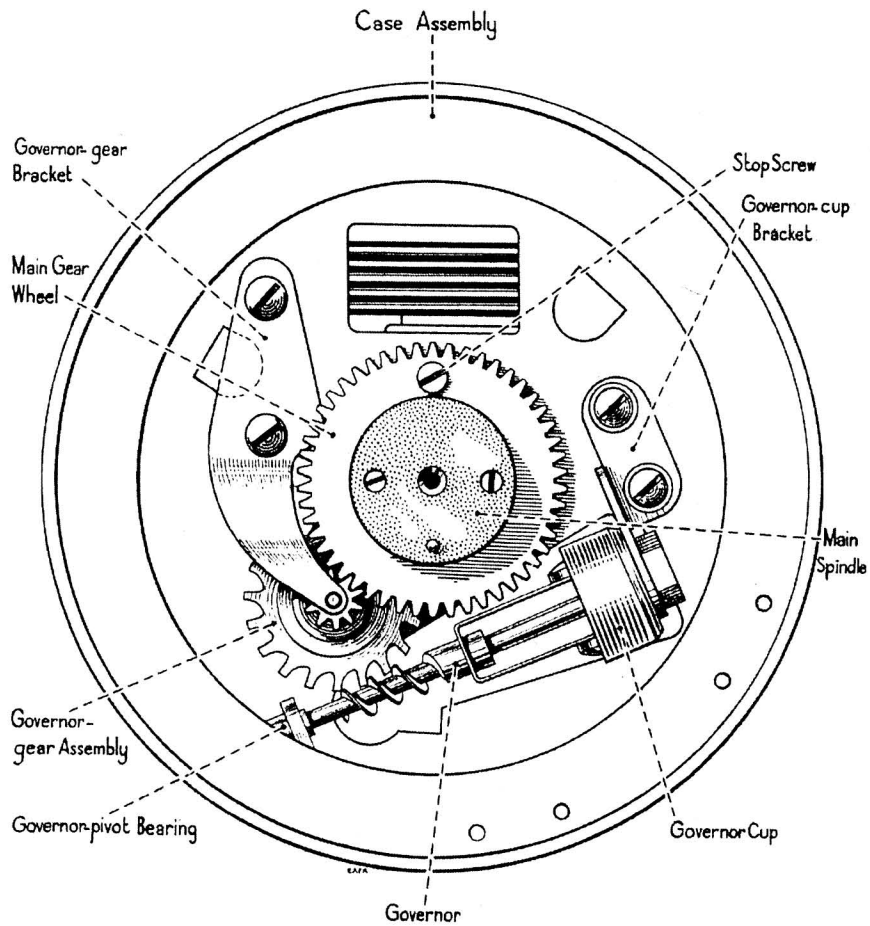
FRONT VIEW WITH FINGER PLATE REMOVED
